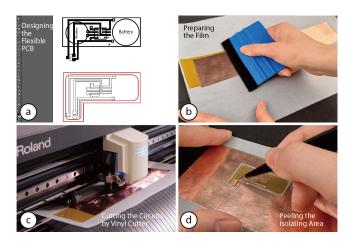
(a) Designing the flexible PCB in Adobe Illustrator. (b) Adhering the copper tape on the Kapton tape. (c) Cutting the circuits with the vinyl cutter. (d) Removing the cut-out copper using tweezers.
